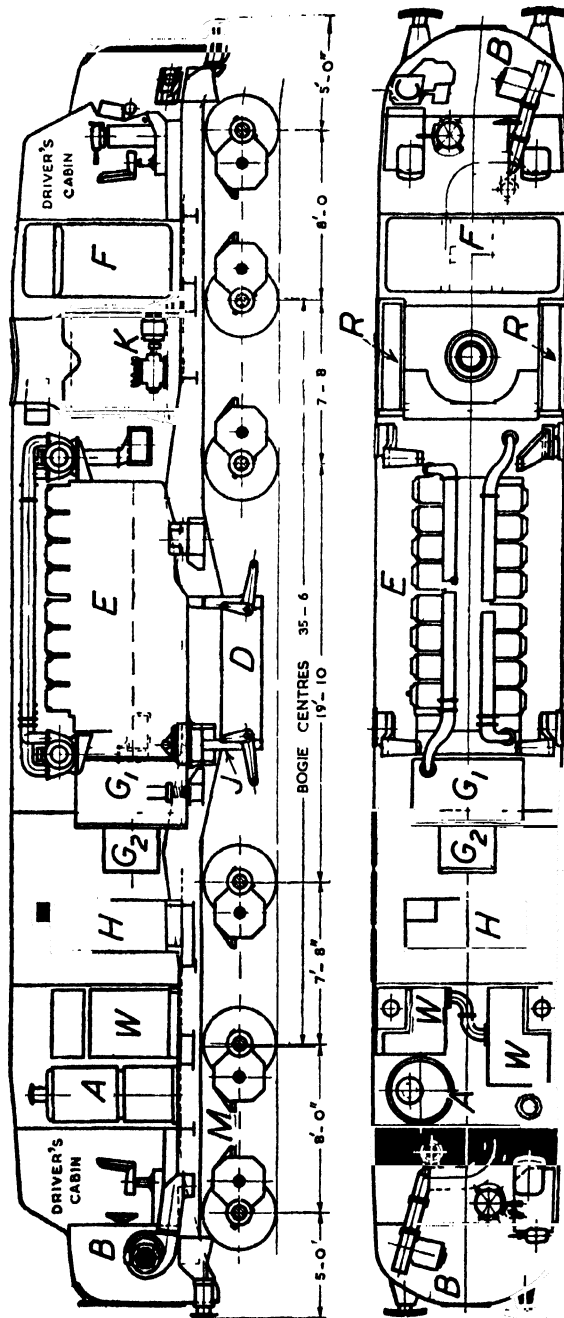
LAYOUT OF PLANT AND EQUIPMENT ON MAIN LINE DIESEL ELECTRIC LOCOMOTIVE (BRITISH RAILWAYS)
